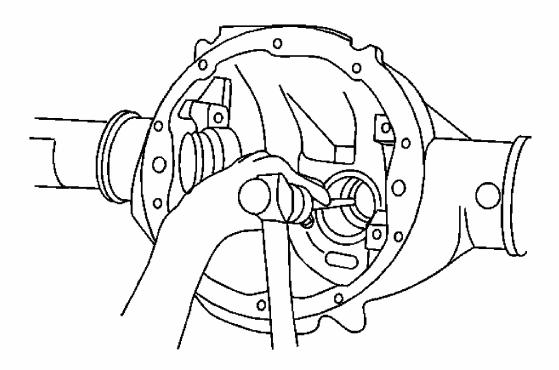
View Of Outer Pinion Bearing Cup Courtesy of GENERAL MOTORS CORP.
